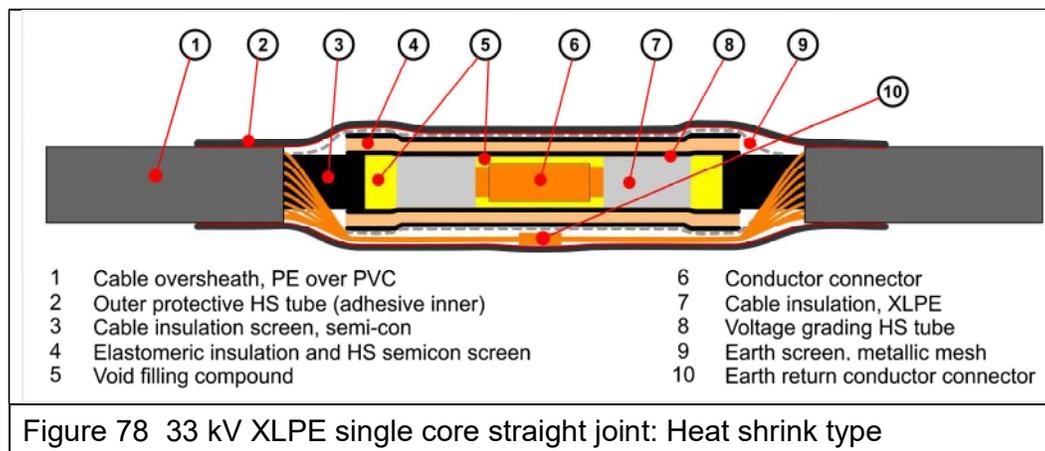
33 kV XLPE single core straight joint: Heat shrink type
